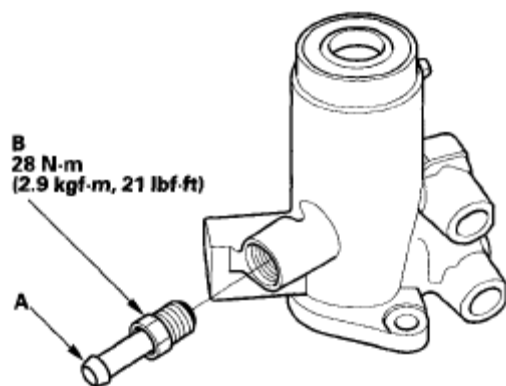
Identifying Return Line Joint And Flare Nut (With Torque Specifications)
